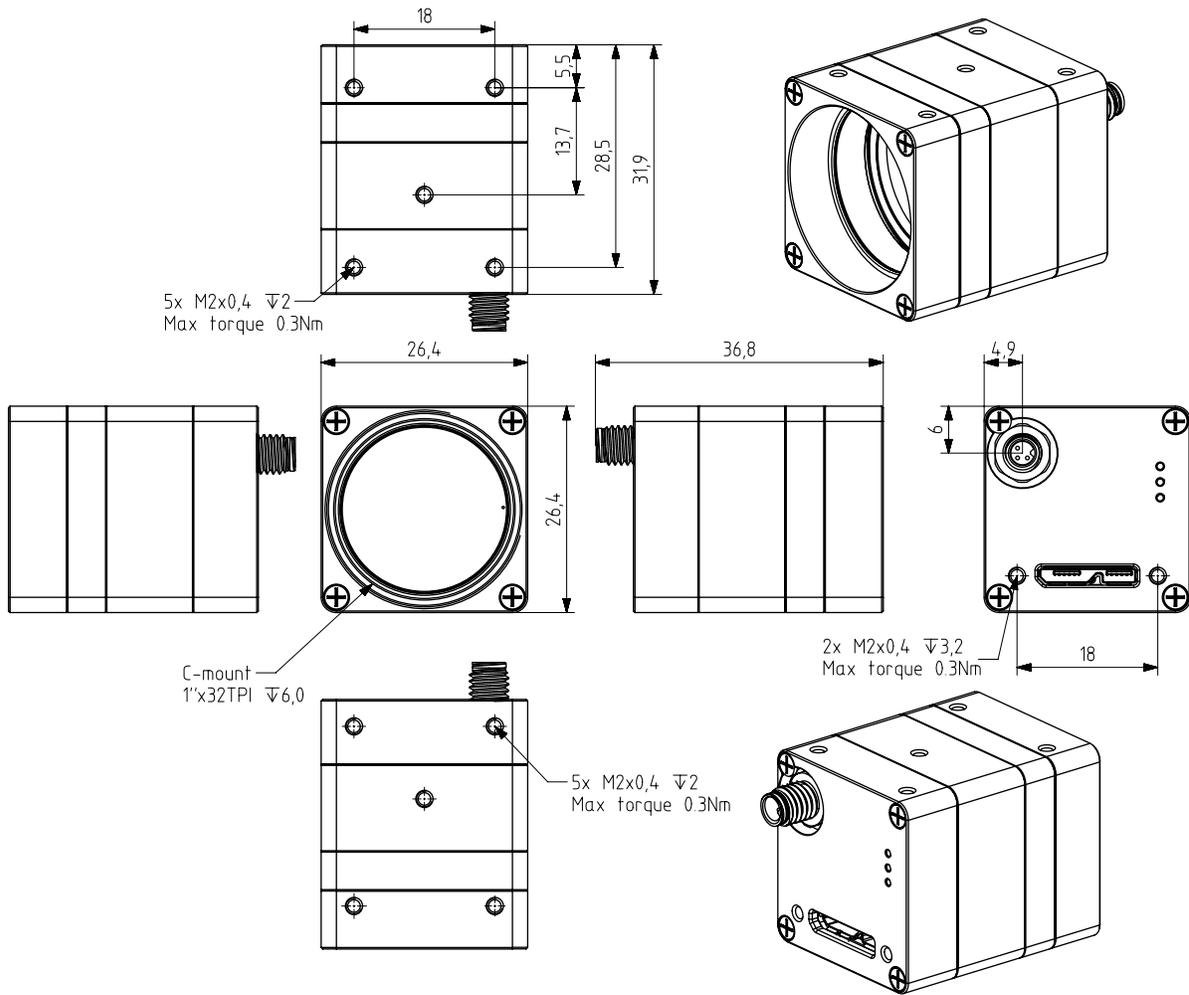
Dimensional drawing of MQ022/042xG-CM-S7
